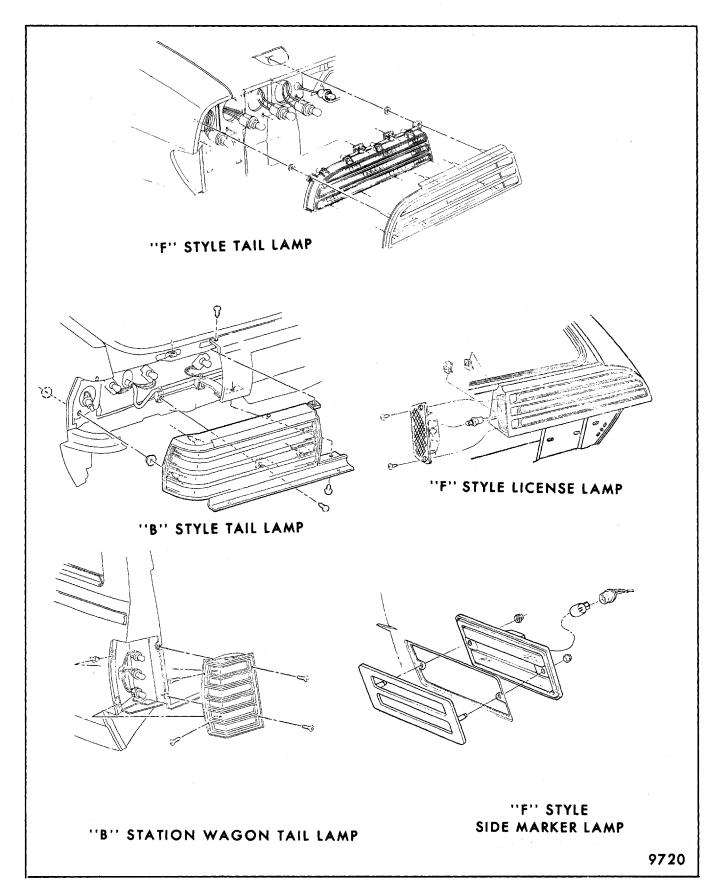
Exterior Lamp Installation - Pontiac Styles
